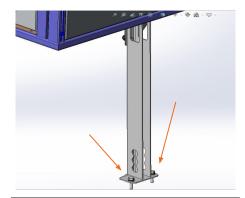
2 Hex Bolts will be inserted through the slots in the mounting bracket
